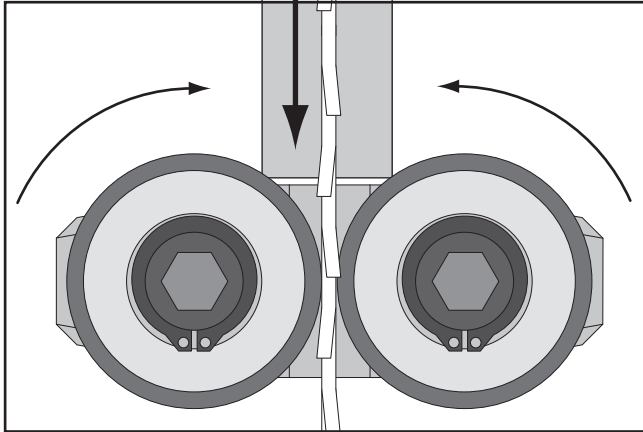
Blade guide bearings evenly and lightly touching the sides of the blade.
